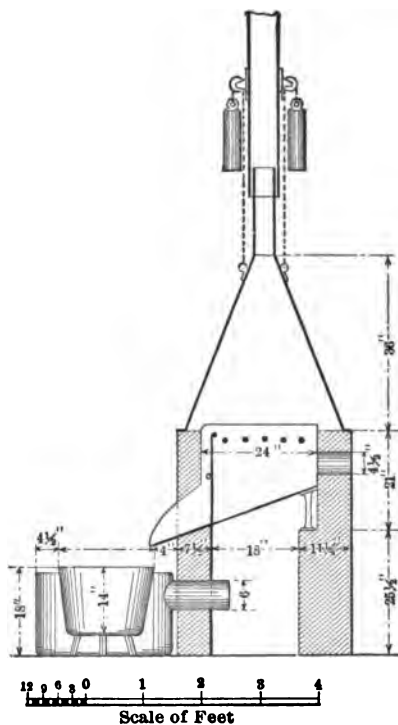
Sectional Elevation. Dutch Refining Furnace
